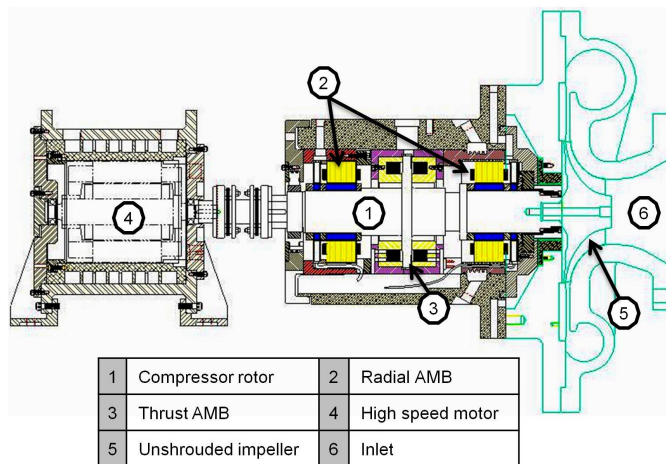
Drawing of the single stage centrifugal compressor with AMBs.
